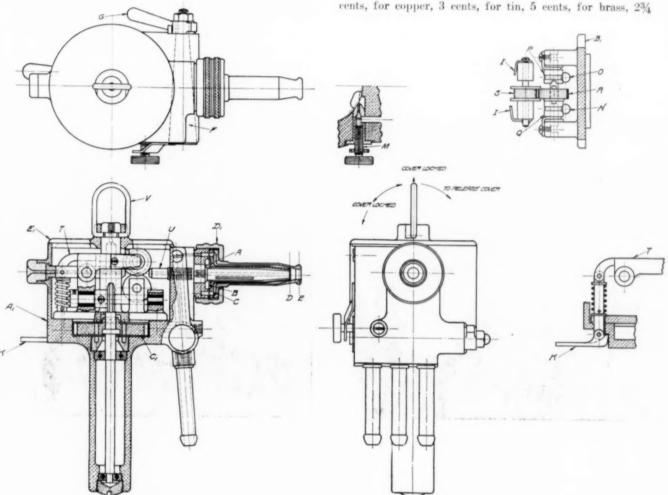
Details of the Commercial Metal Spraying Pistol now in use, showing Turbine, Wire Feed Mechanism, Etc.
